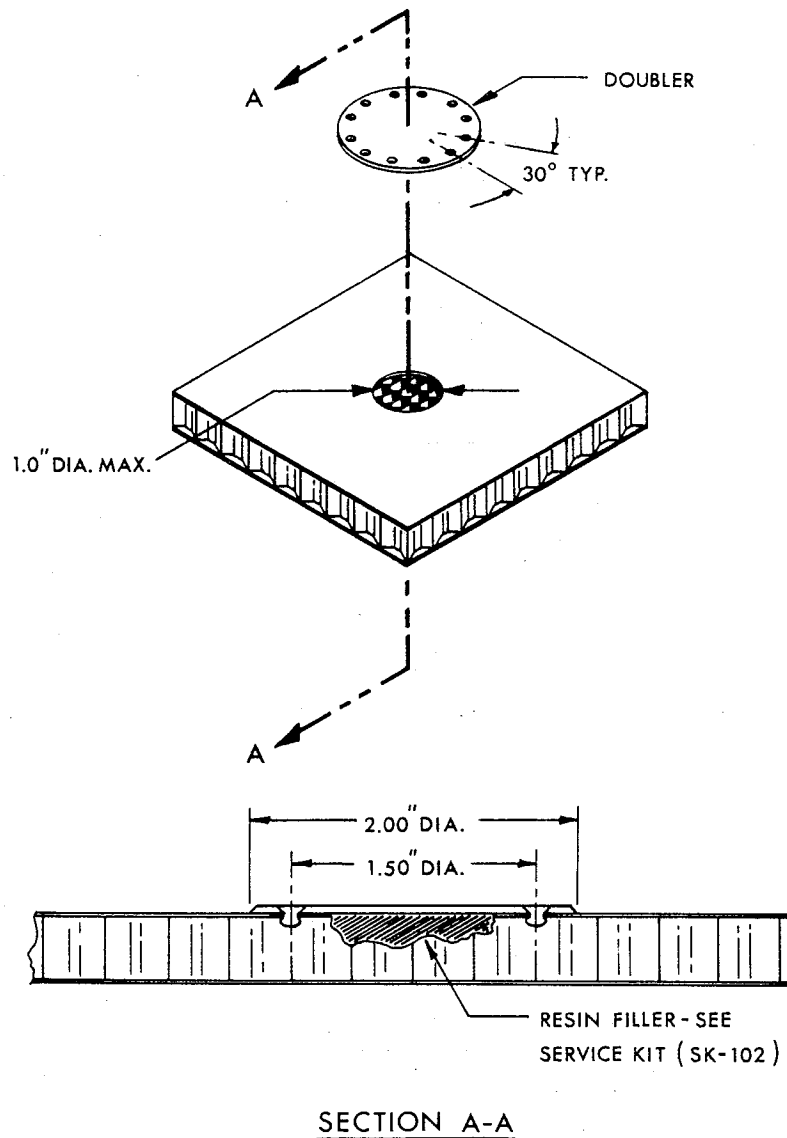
Honeycomb Repair, External Doubler (Riveted)
